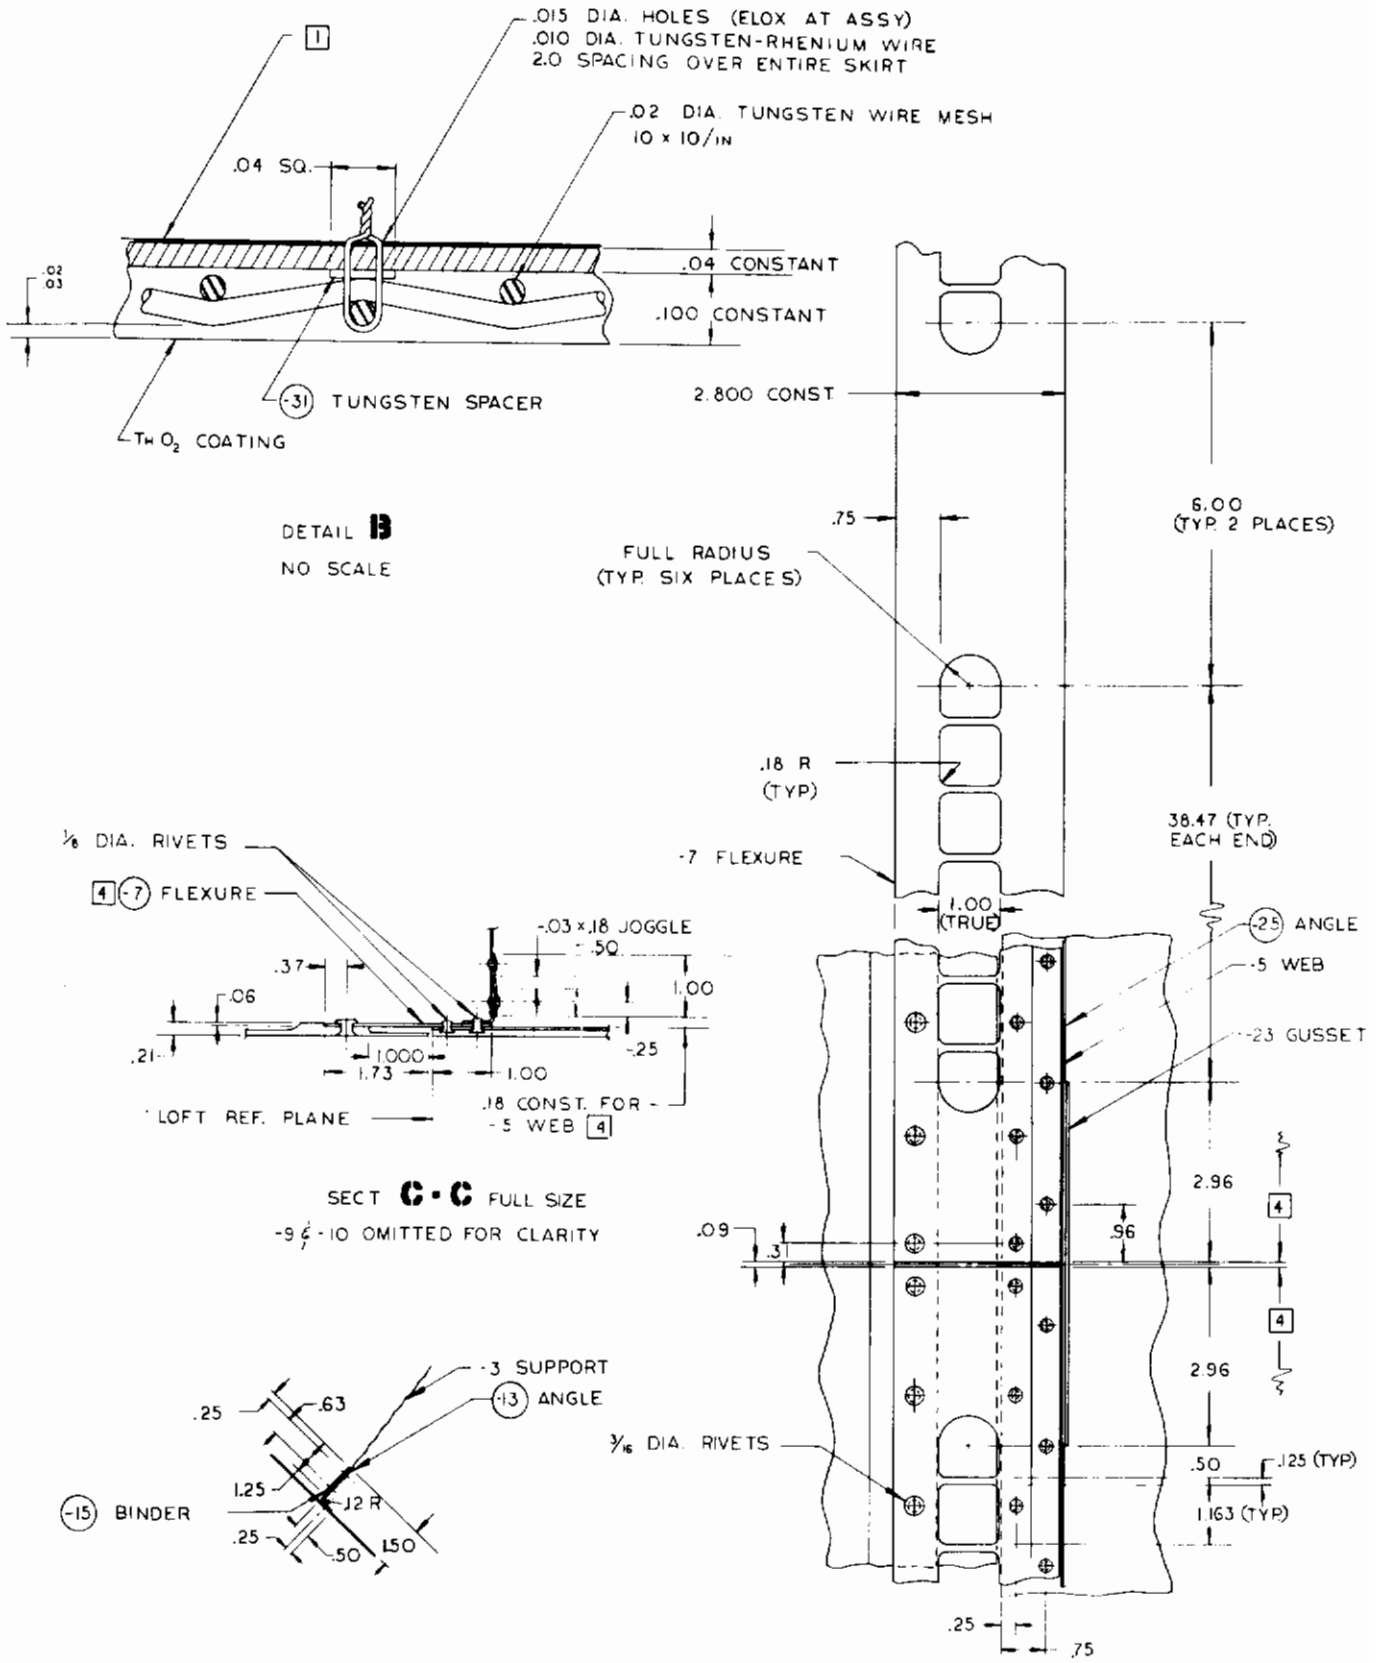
FINAL DESIGN FRONTAL STRUCTURE; Detailed Drawing (Sheet 4 of 6)
